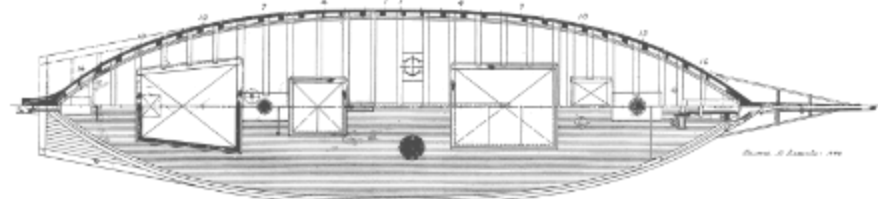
PLATE XVI B. STRUCTURAL PLAN OF FRAME BARGE Lizzie J. Cox.
